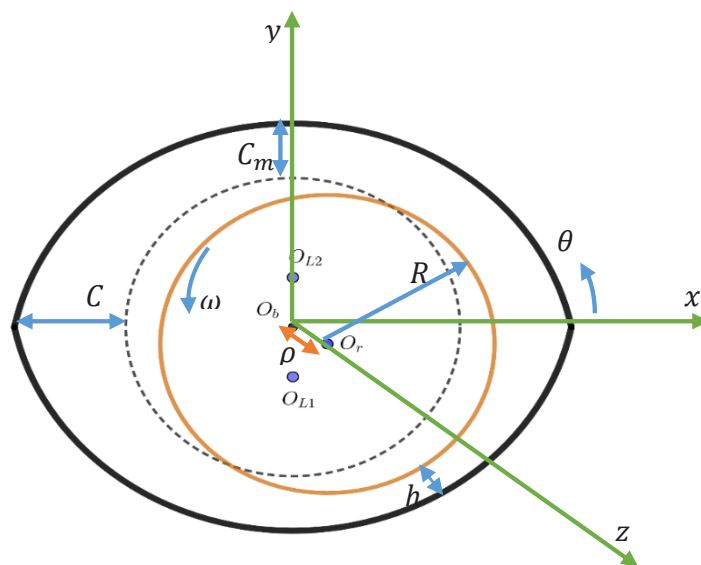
Geometric details of the two-lobe non-circular micro gas bearings
